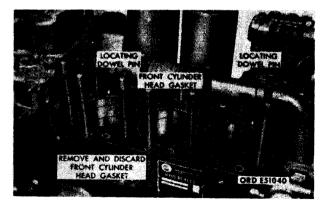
REMOVING OR INSTALLING FRONT CYLINDER HEAD GASKET.
